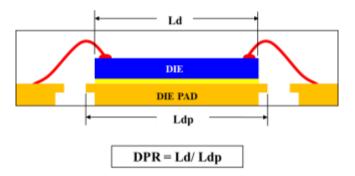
Die-to-pad ratio (DPR) calculation for a QFN package.
